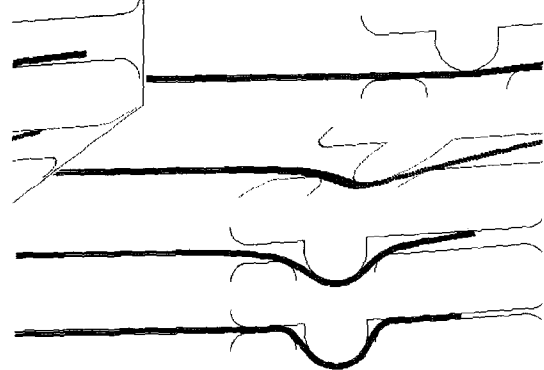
Deformed shapes of the blank at the stroke interval of 2.5 mm during the slanted bead forming process
